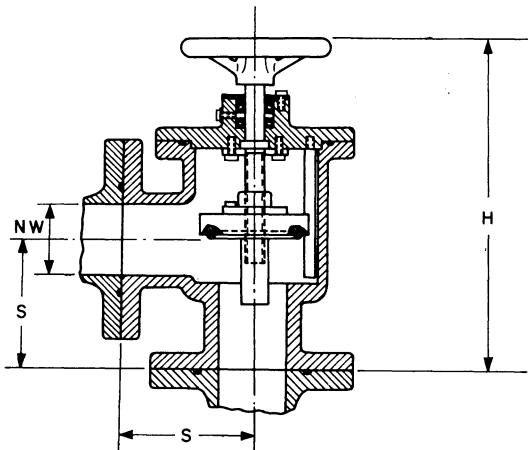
Dimensions of right angle disc (plate) valves supplied by Pfeiffer⁹⁸⁷ (Table 6.10)
